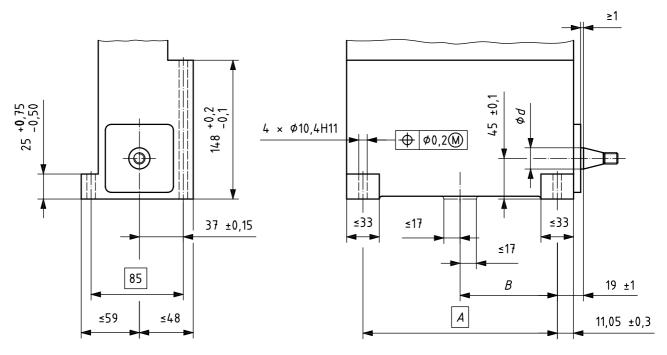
Base-mounted in-line fuel injection pump — Type 2
